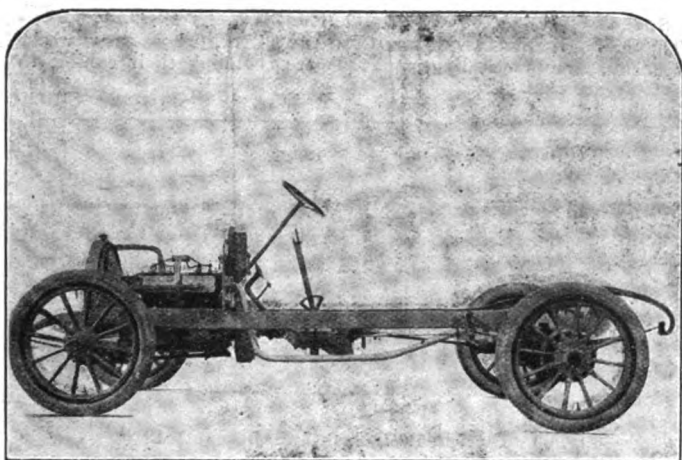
Chassis of the Hotchkiss 16-20-h.p. Car.
